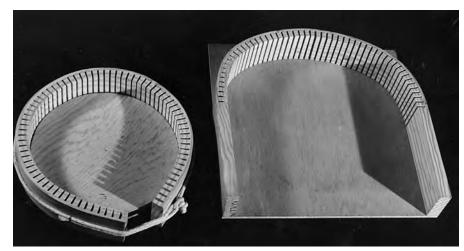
A good amount of wood bending can be done by using the kerfing technique. Kerfs can extend the full length of the workpiece or be confined to an area.
